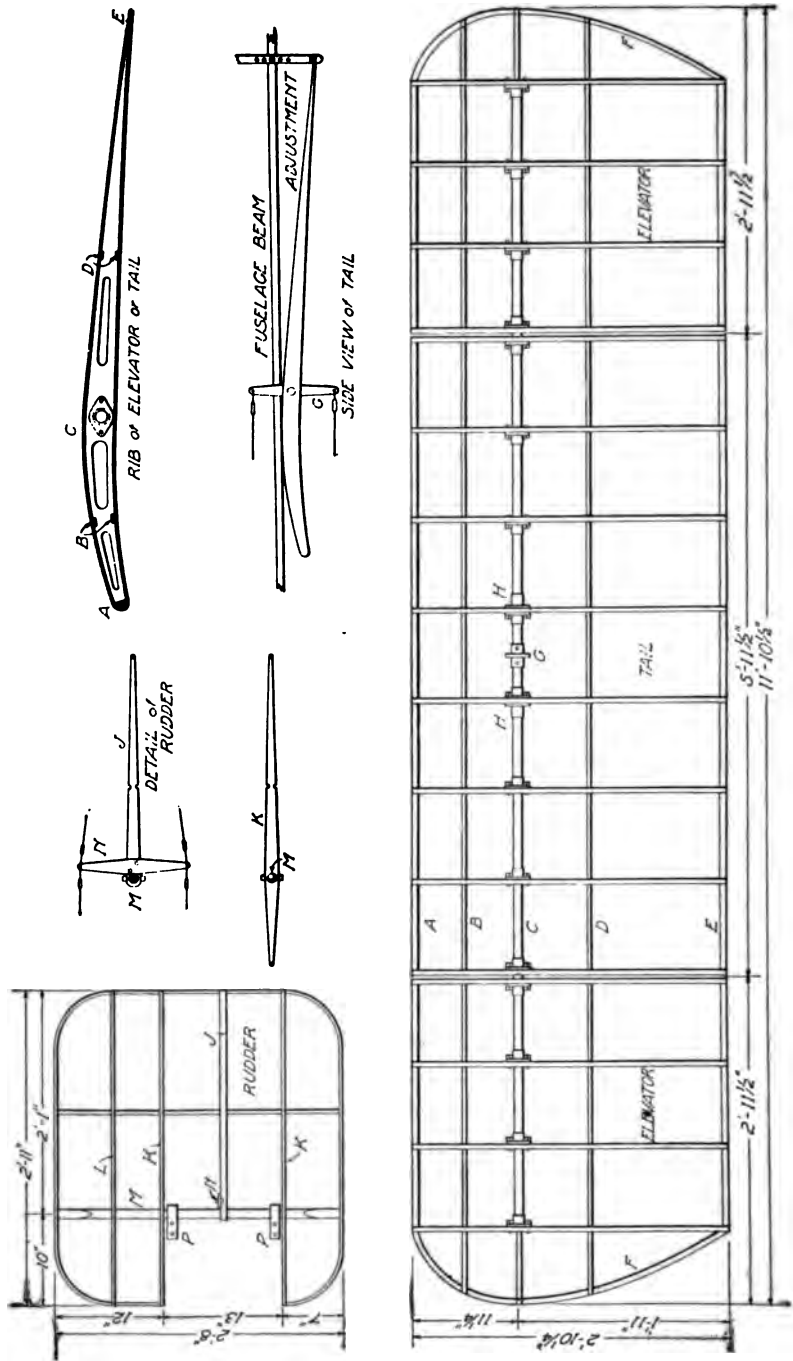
Construction Details of Bleriot Tail, Elevators, and Rudder
